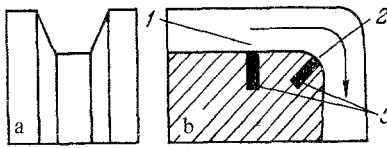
Diagram of the model of a casting unit: a) front view; b) side view.
